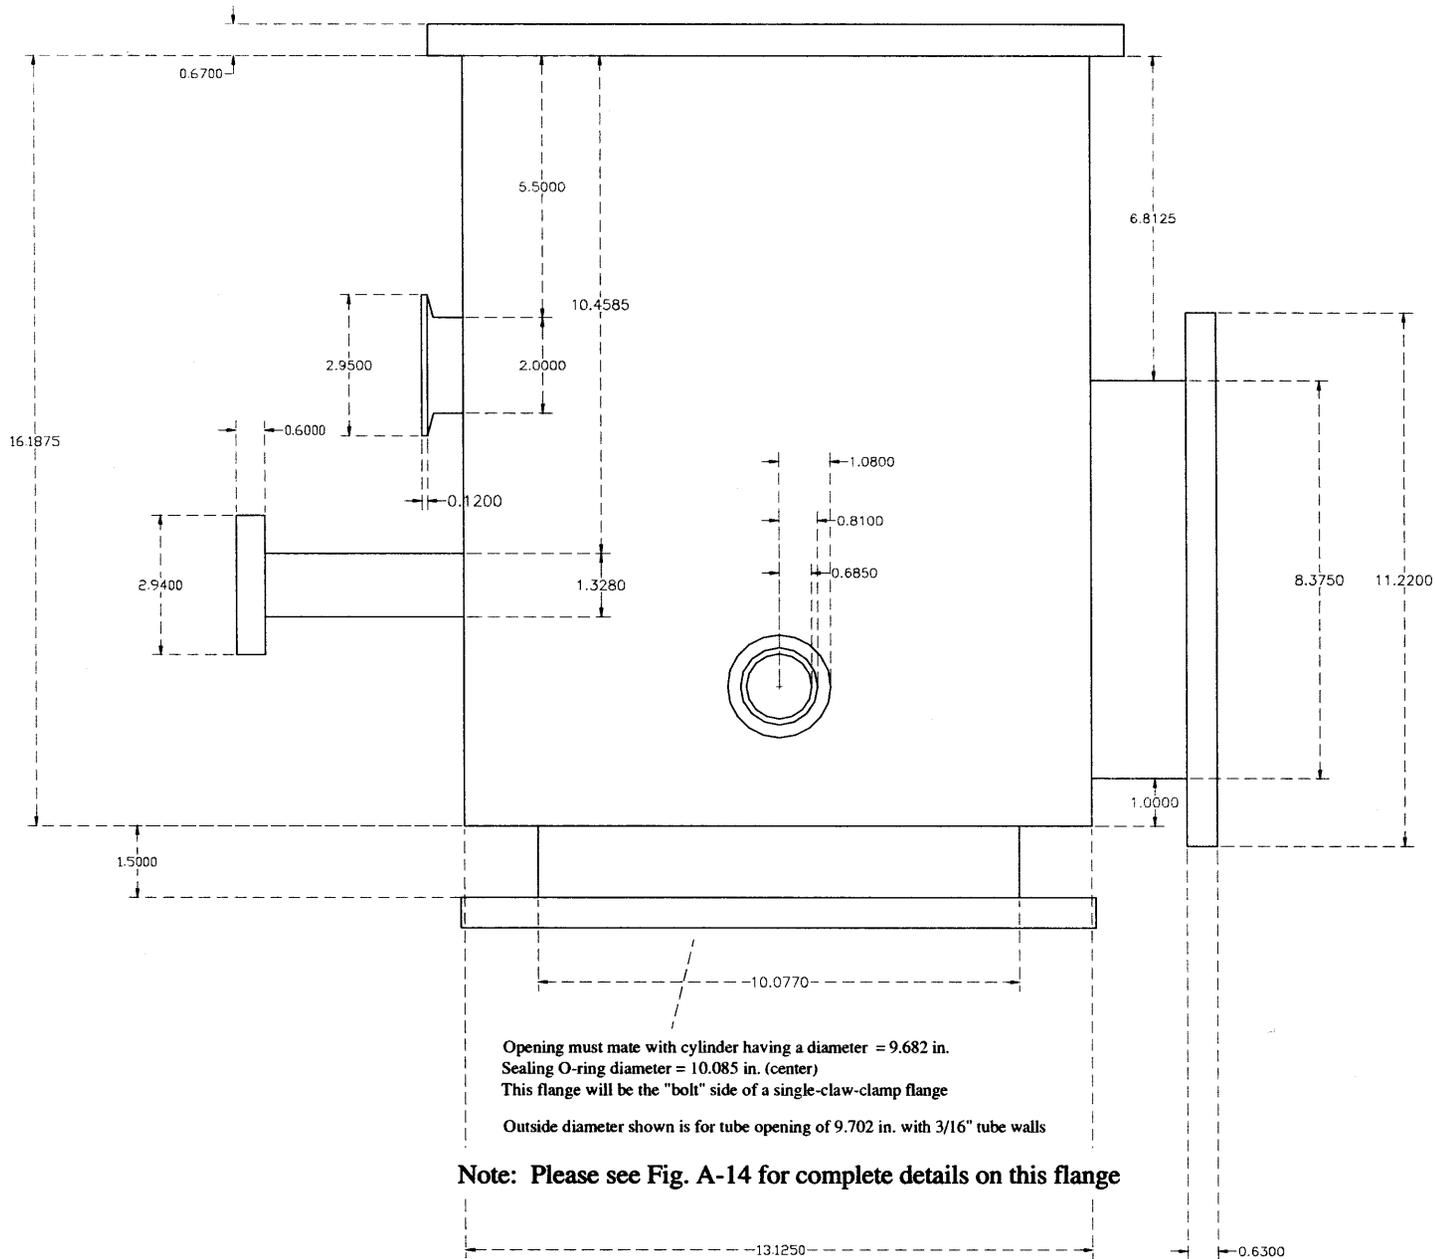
Side view, rotated 90° cw from front (4 top viewports not shown)
